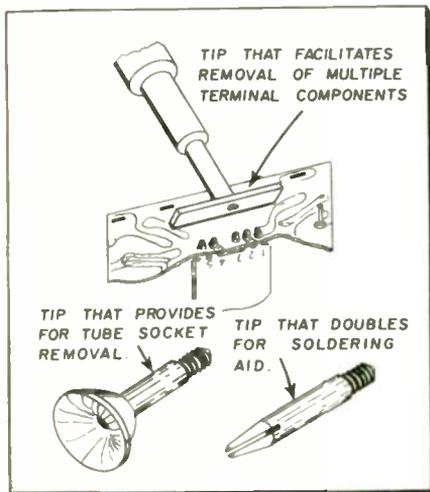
Special soldering iron tips speed replacement of printed circuit components.
